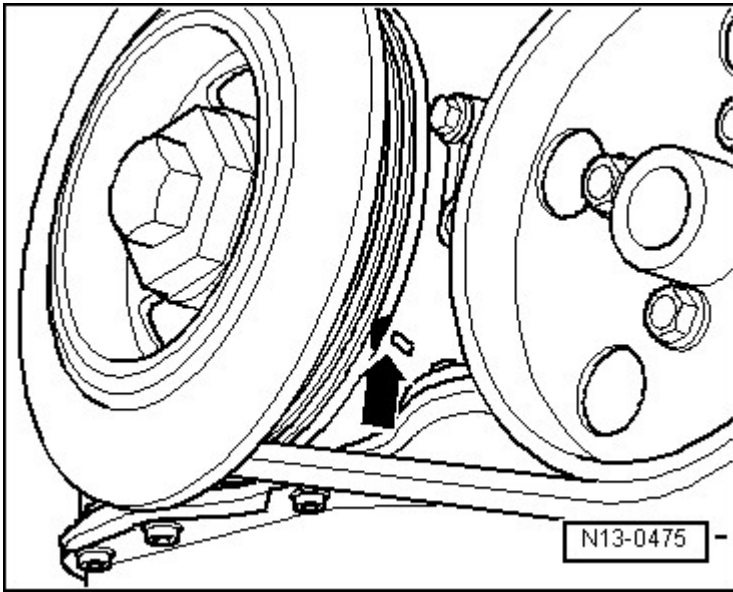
Identifying Crankshaft At Vibration Damper Securing Bolt In Engine At TDC Cyl. 1
